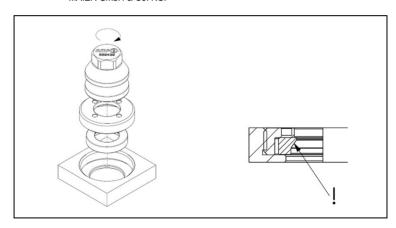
Installation of counterbalance clamping sleeve 6214ZN-01-02
